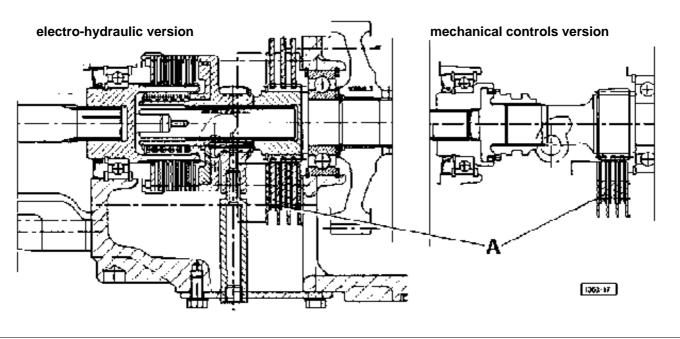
Parking brake assembly; (A- BRAKES DISK).
